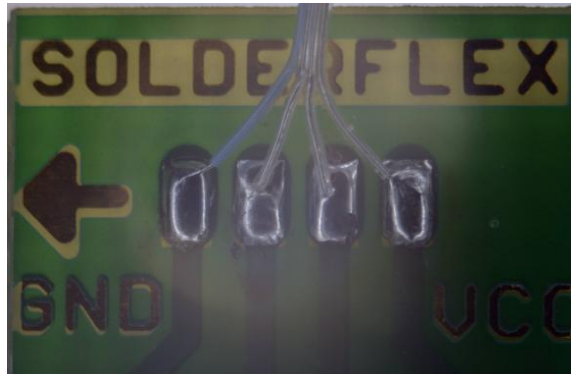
shows an example of the soldered wires on the 4-pin PCB connector, where the VSS/GND wire is on the most-left connector position and VCC is on its most-right.
